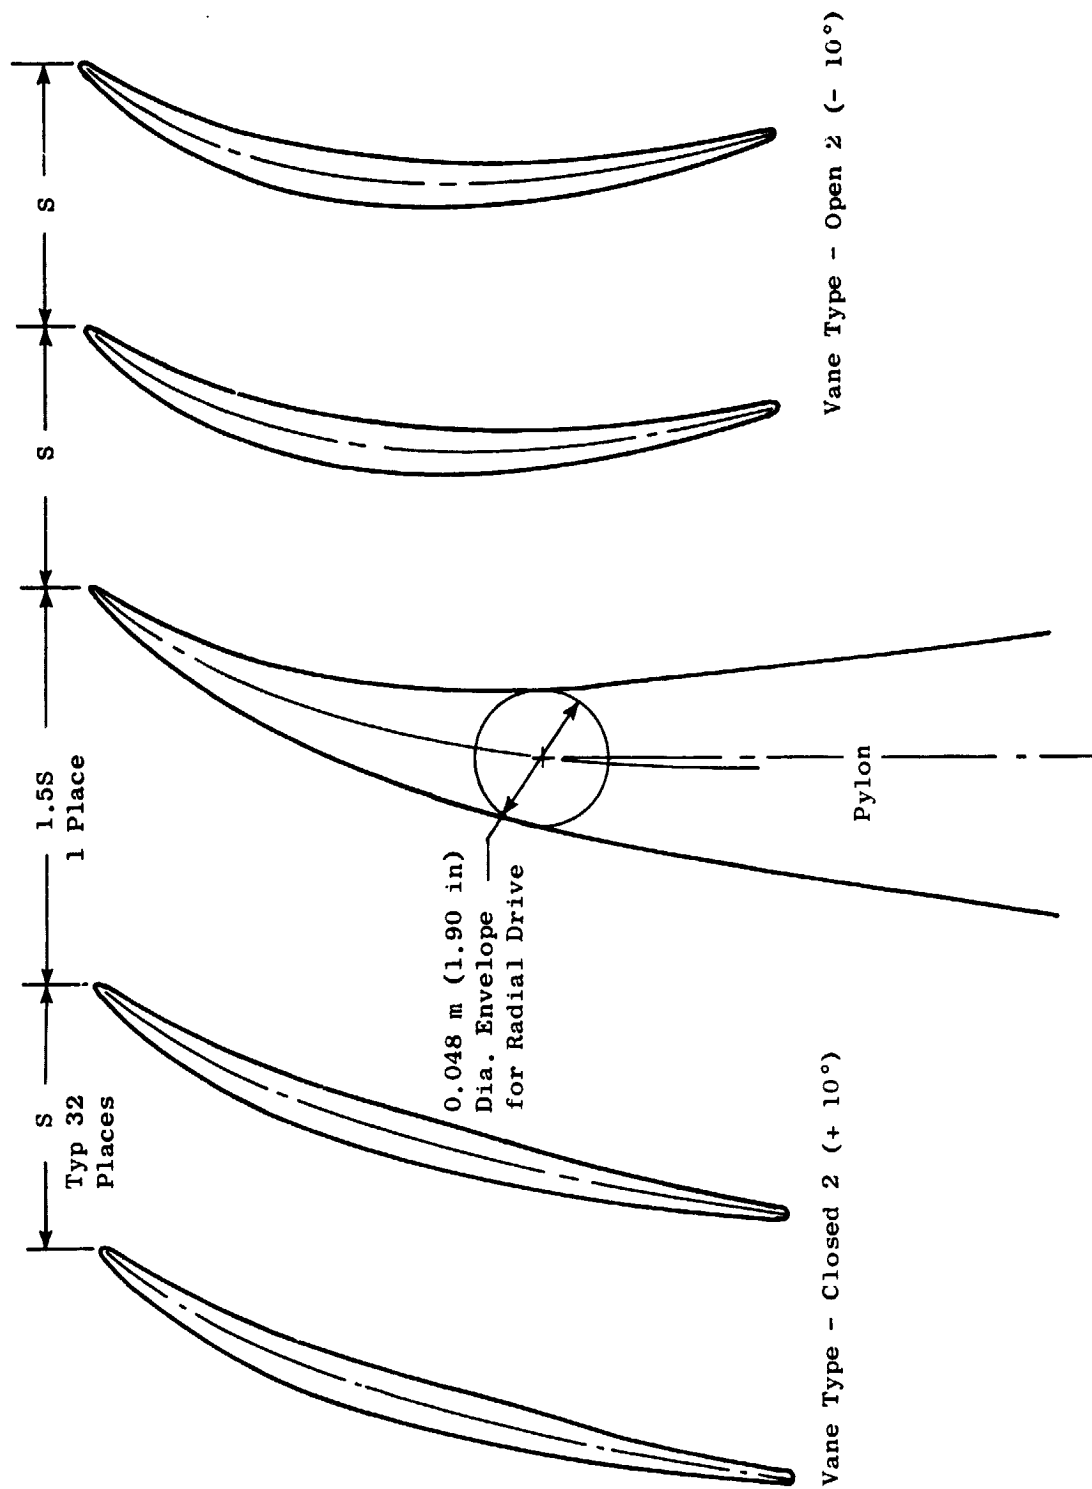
Vane-Frame (Fan Bypass OGV) Unwrapped Section at ID, 32 Vanes Plus Pylon LE Fairing.
